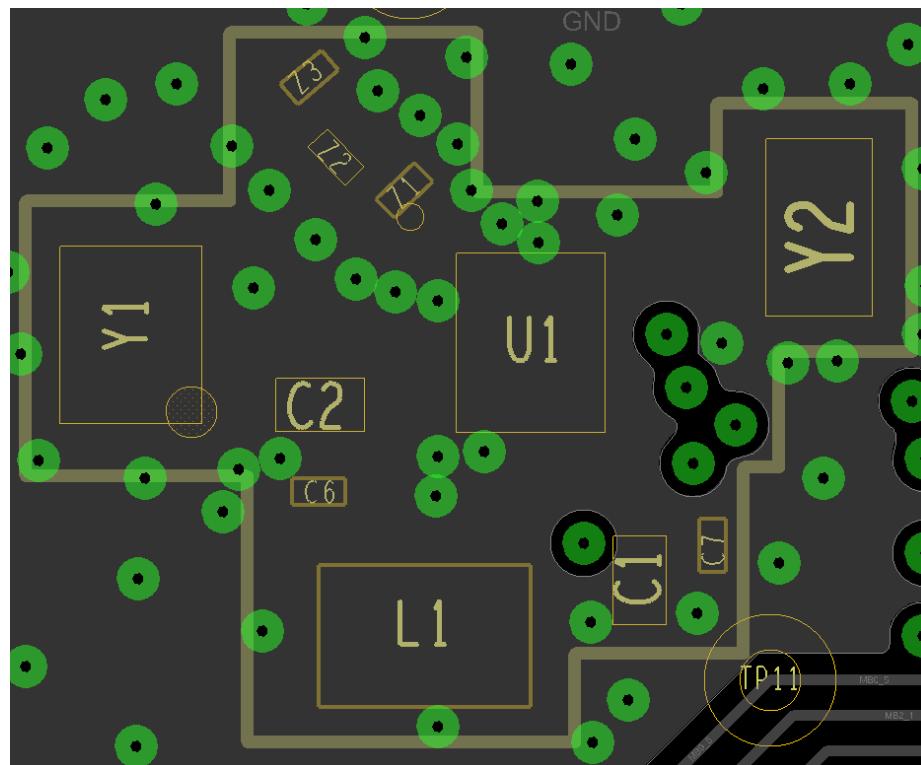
WLCSP17 PCB Placement and Routing – Bottom Layer
